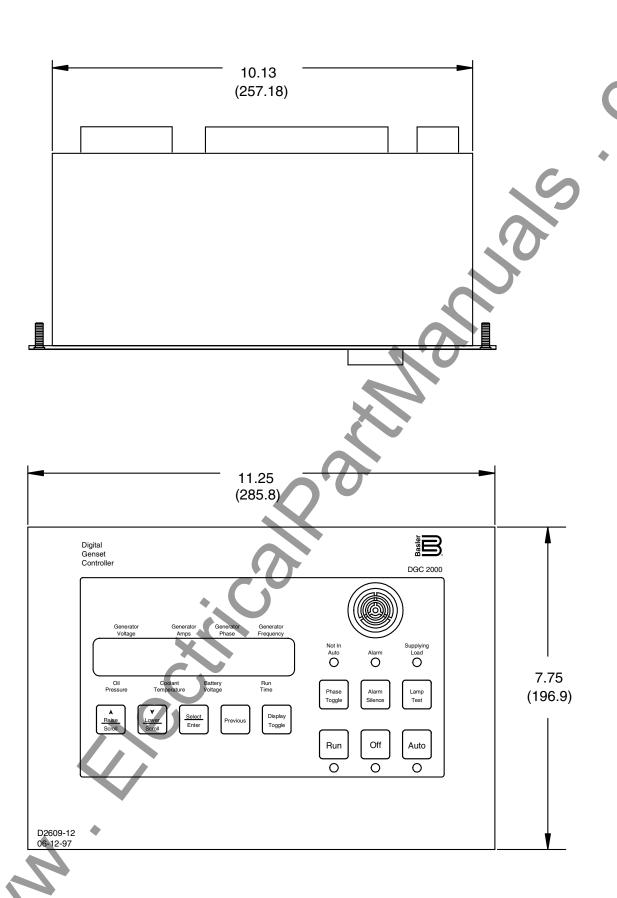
DGC-2000 Overall Dimensions In Inches (Millimeters)
